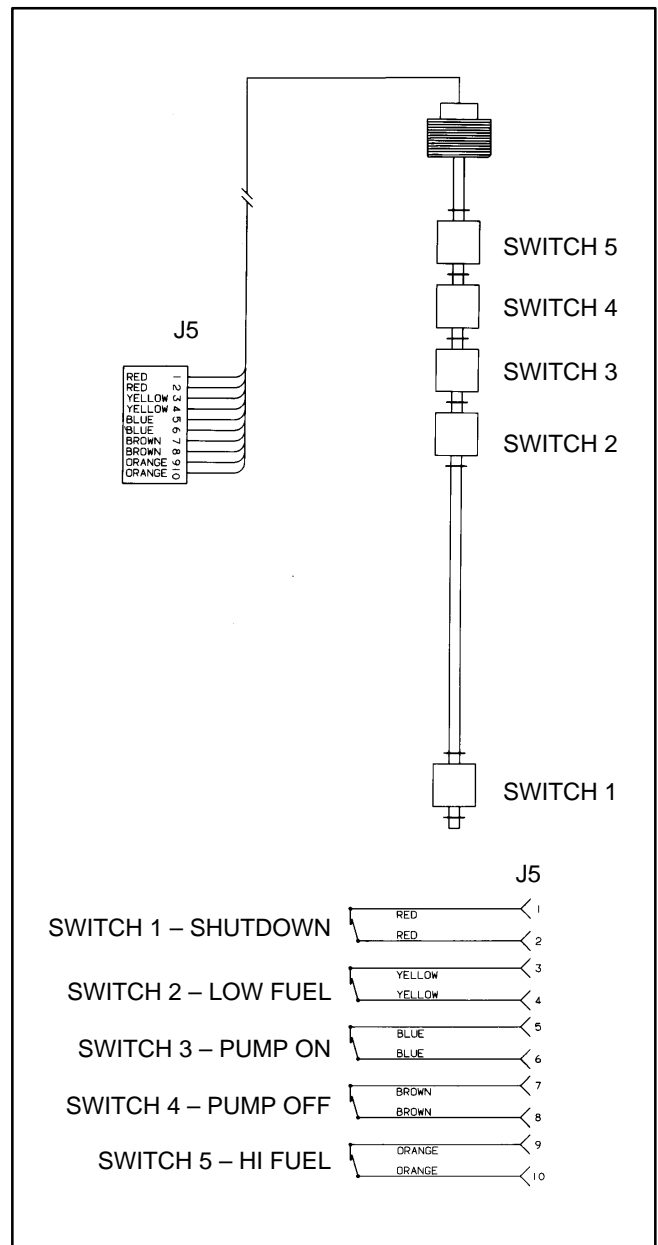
FLOAT SWITCH ASSEMBLY
